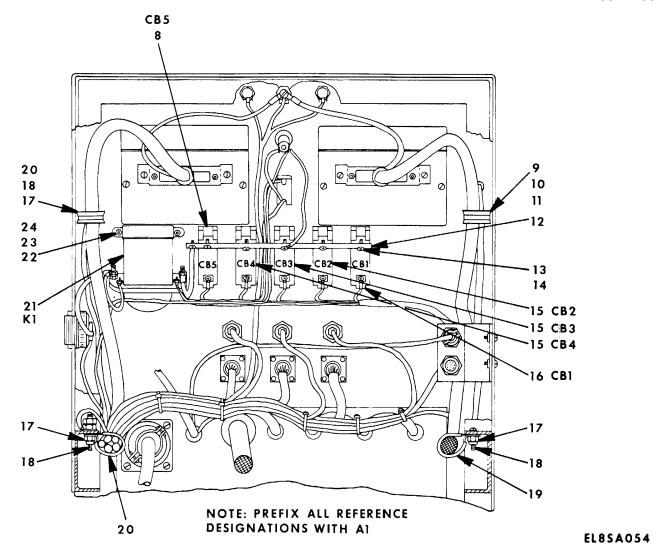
FRAME ASSEMBLY (V)1 & 2 (SHEET 2 OF 4)
